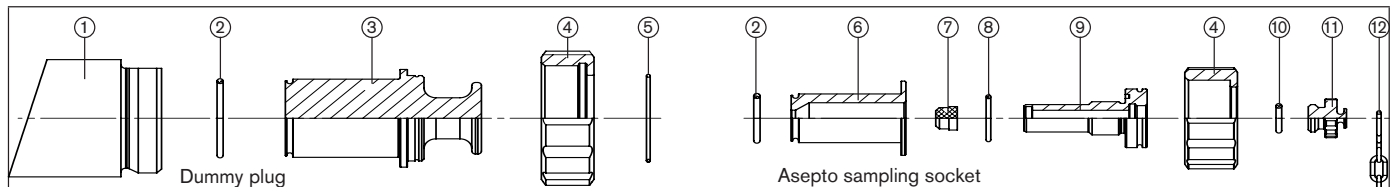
Assembly of dummy plug and Asepto sampling socket Type BBS-11
